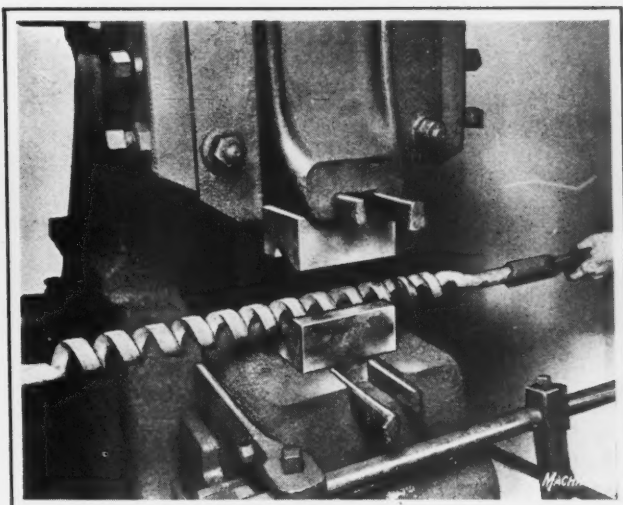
Ship Auger being screwed through Bottom Die in Final Hammering
